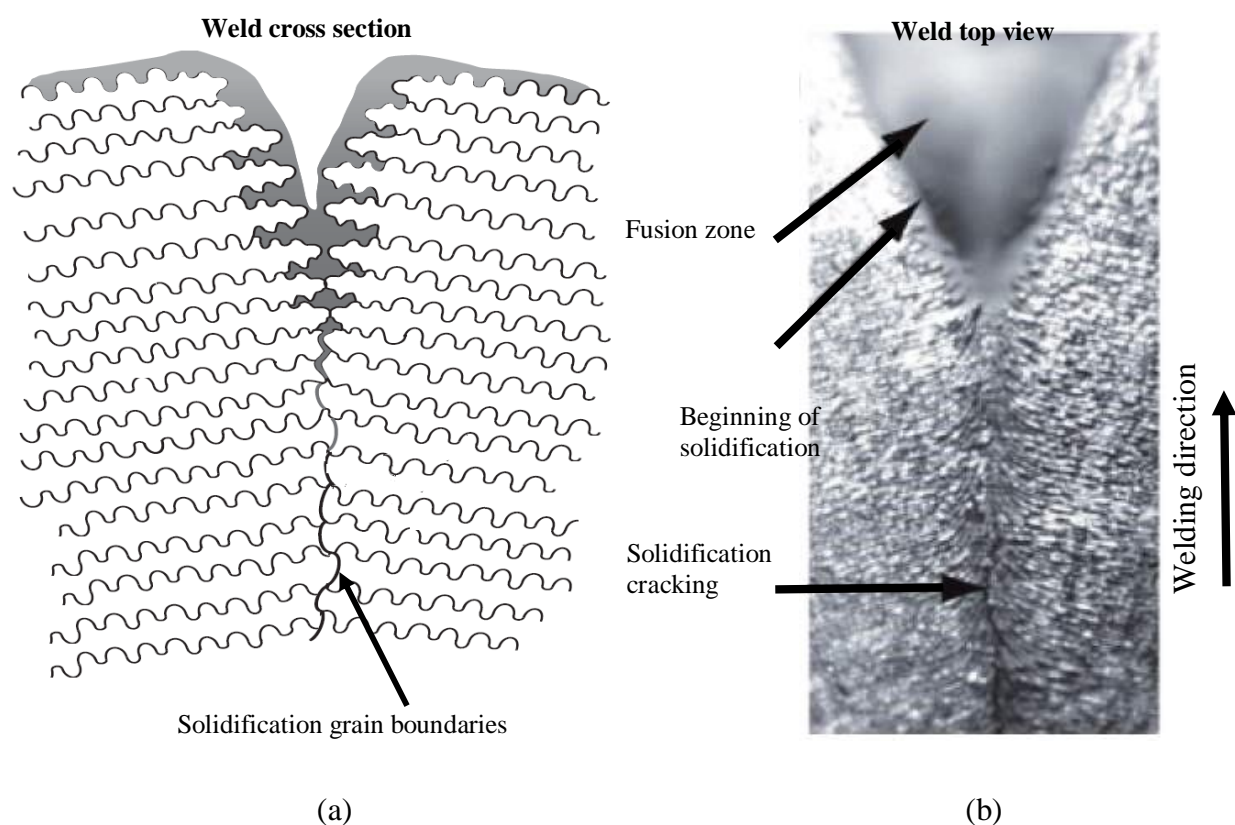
(a) Solidification grain boundaries in a weld metal [12]. (b) Formation of solidification cracking during welding process [13].
